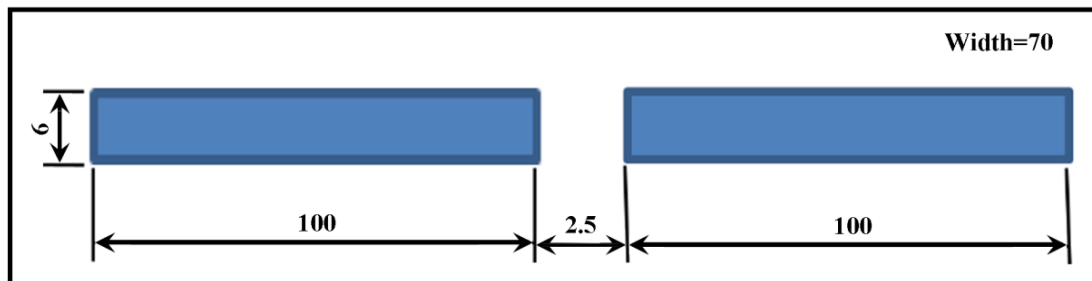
Weld joint employed in this study (DIMS in mm)
